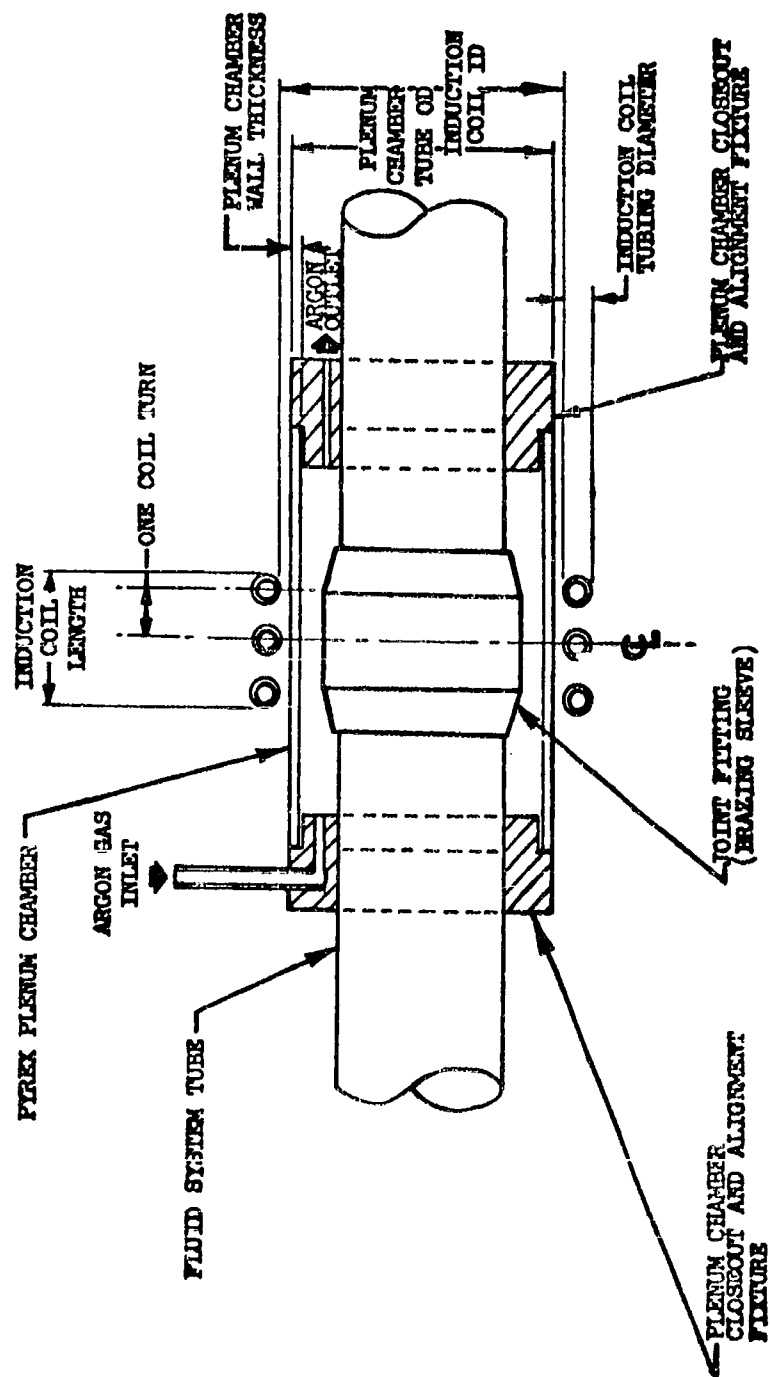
Schematic of Brase Tube Joining Tooling Set-Up.
